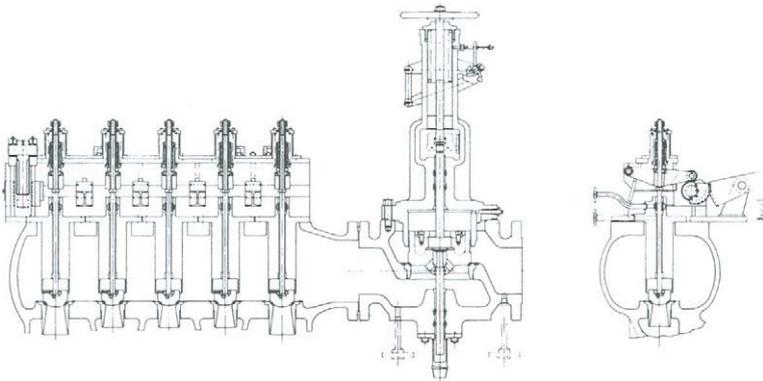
Cam lift: five valve individual cam lift mechanism (Courtesy of IMO Industries)
